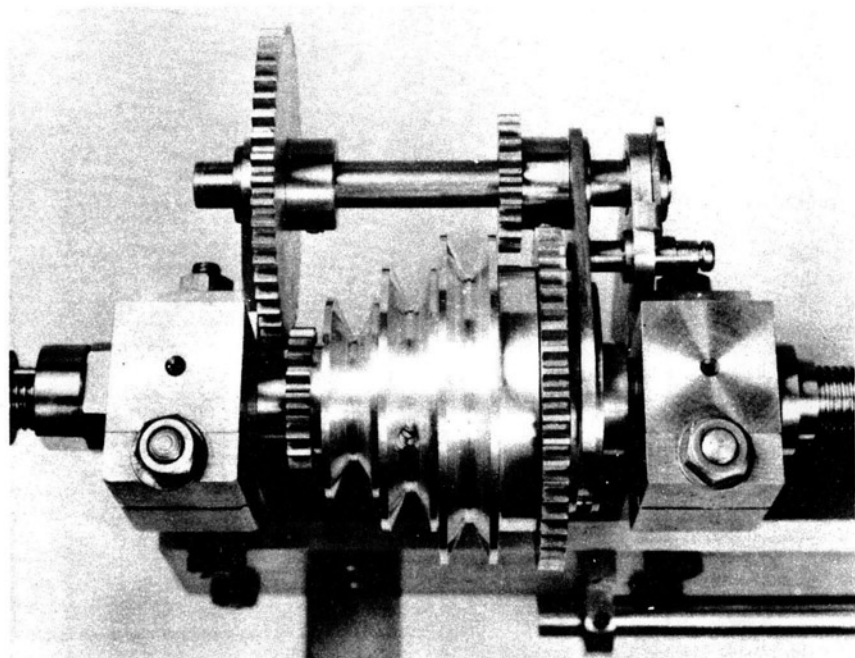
Direct drive position; back gears out of action and driving pins locking pulley and bull wheel together.
